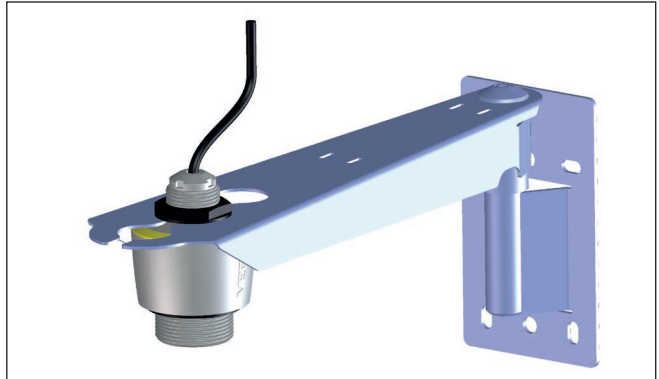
Mounting bracket for turnable wall mounting - Example sensor with G1 mounting thread and axial cable outlet
